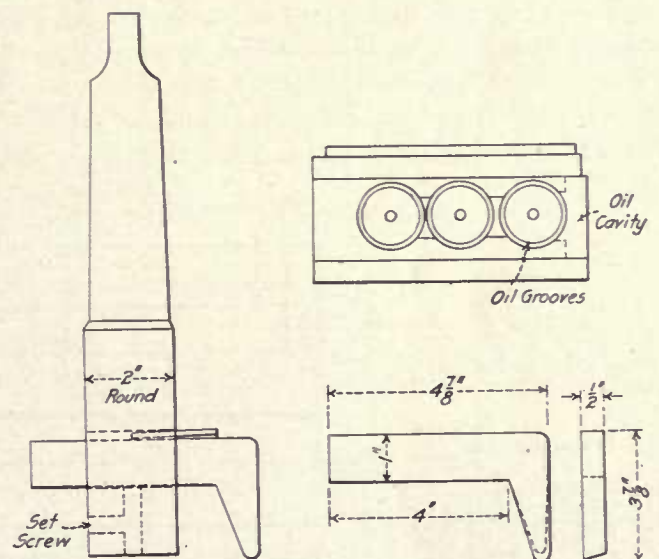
Tool for Making Oil Grooves in Driving Box Shoe and Wedge Faces.
